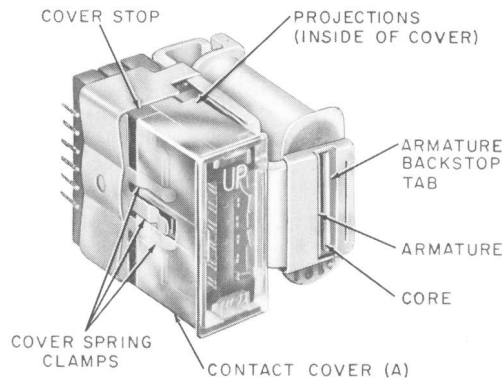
6-Position Relay (BF-, BG-, BL-Type)
